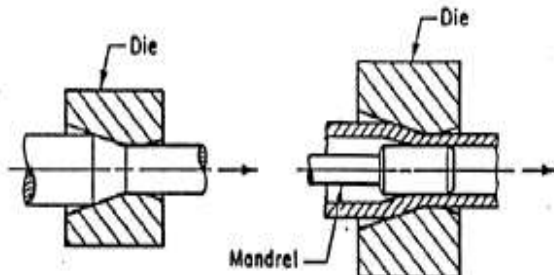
Types of Cold drawing (a) wire and bar drawing and (b) Tube drawing
